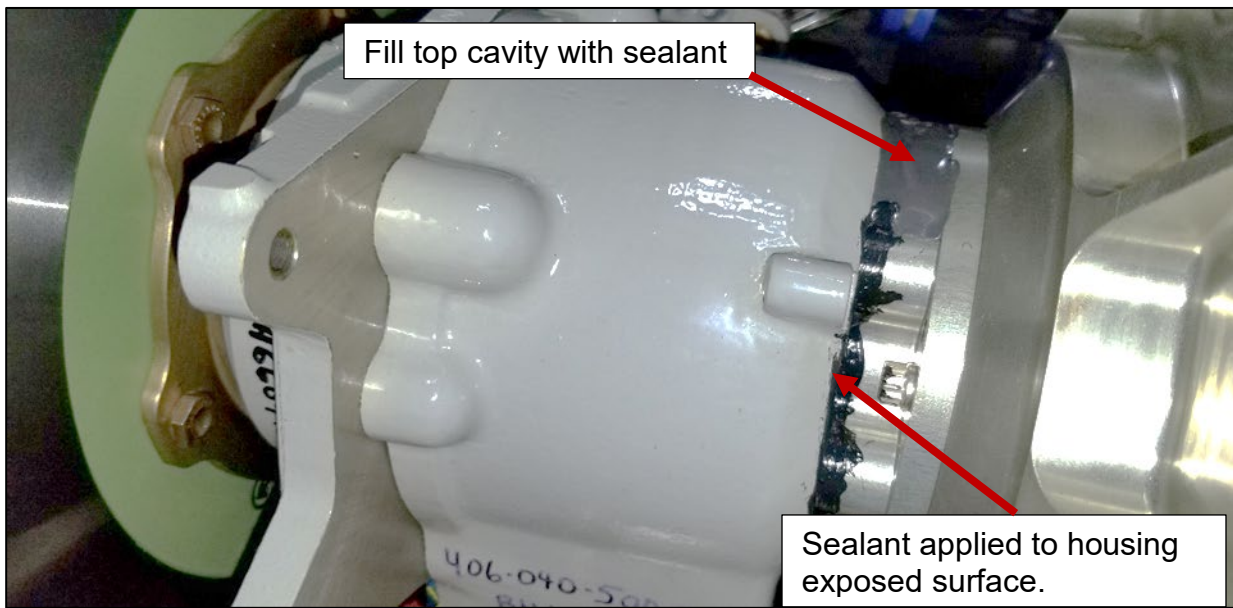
Freewheel Housing with Sealed Housing Surfaces
